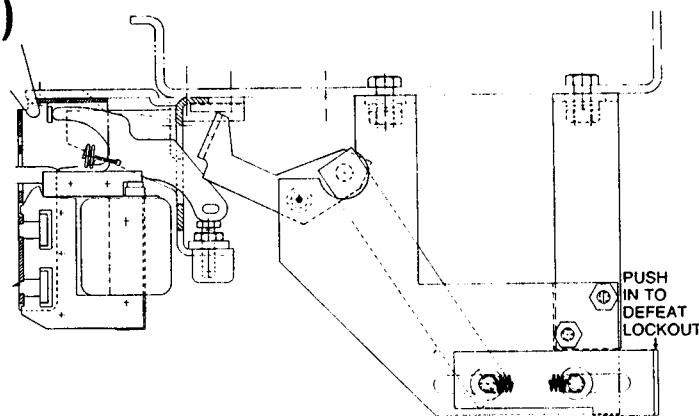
ELECTRIC LOCKOUT DEVICE
